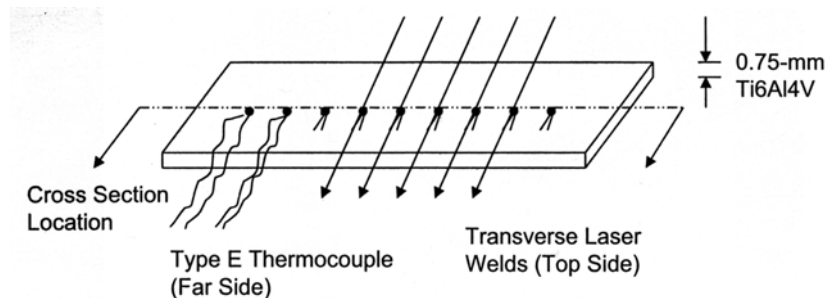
Typical Bead-on-Plate Weld Sample, 0.75-mm Ti6Al4V with Type E Thermocouples (Far Side) and Weld Beads Transverse on the Top Side
